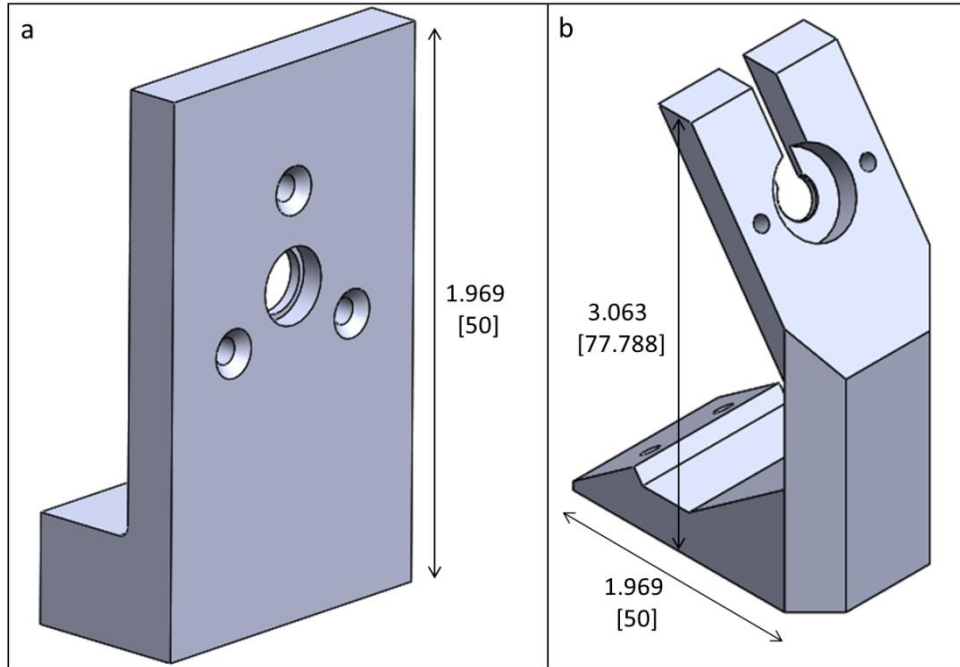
The gimbal support structure is made up of the gimbal motor mount (a) and the gimbal support (b). Dimensions in inches [millimeters].
